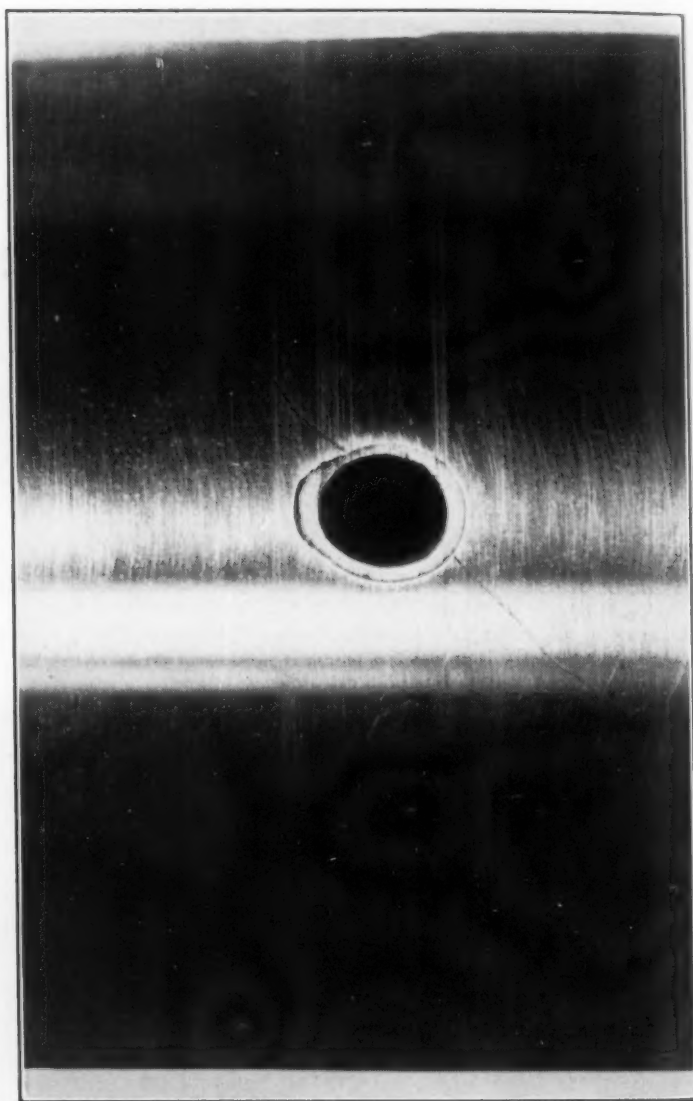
Photograph of Crankshaft Journal Showing Crack at Oil hole. (About Actual Size.)
